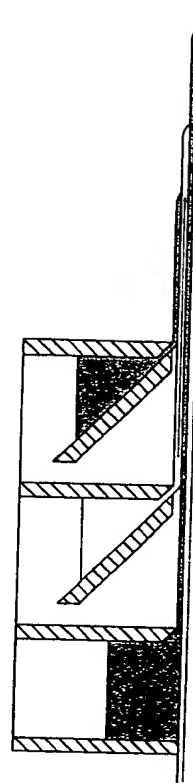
Schematic drawing of a doctor-blade arrangement for multiple-layer casting.
